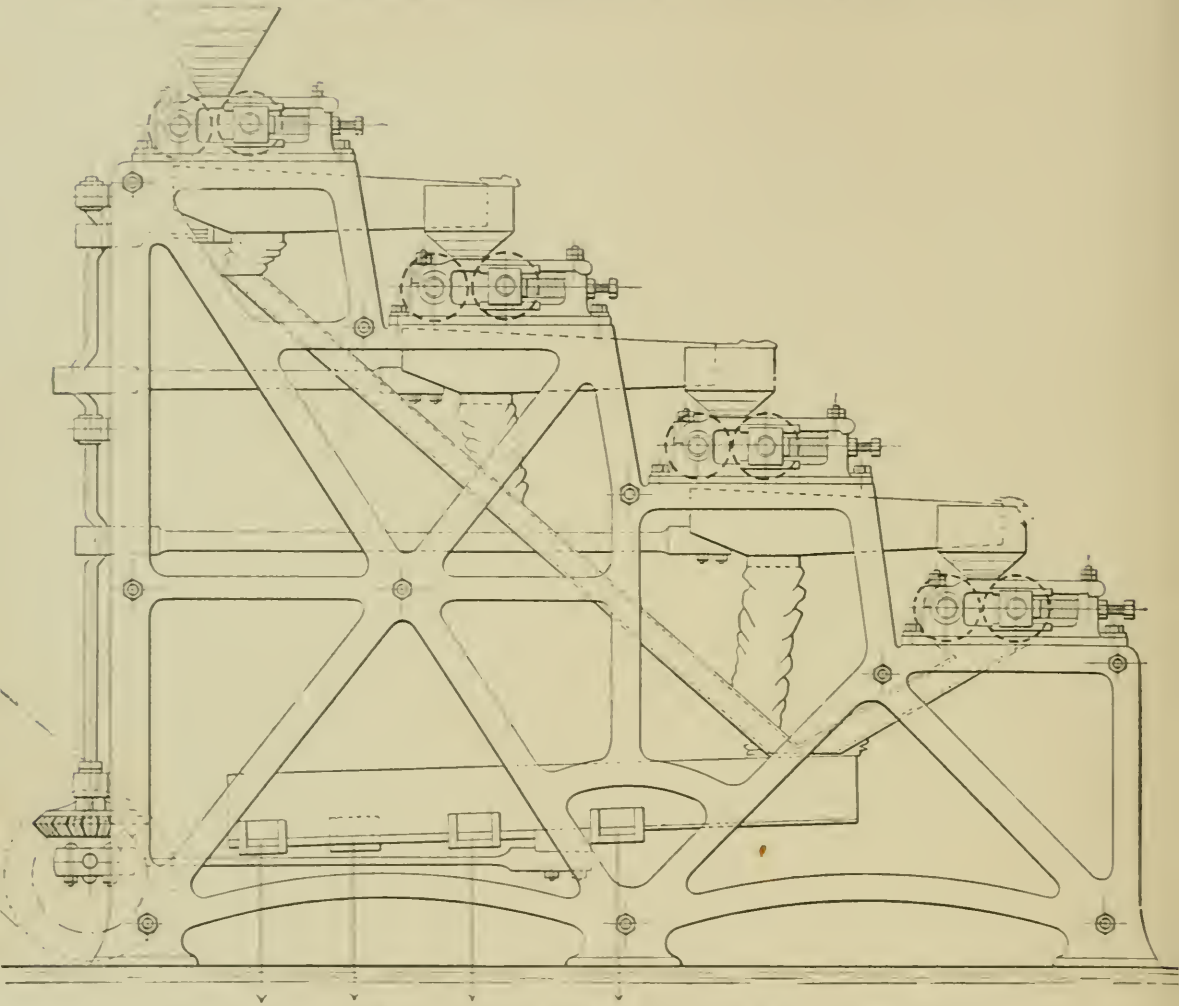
Corning Machine, made by Maschinenbau A.-G. Golzern-Grimma
